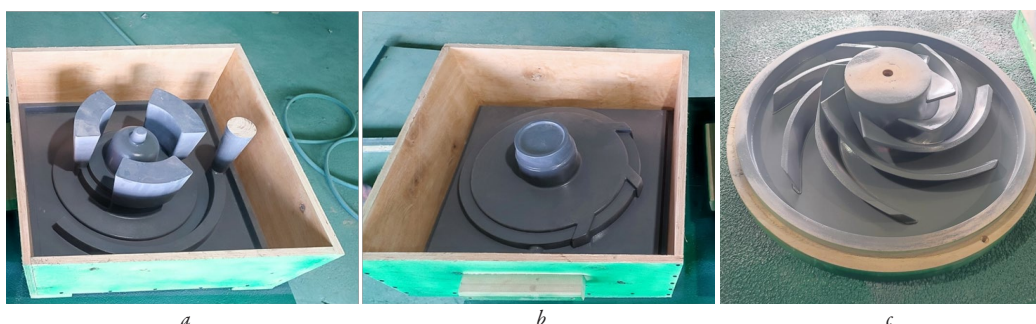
Elements of the impeller model tooling after manufacturing: *a* – model of the lower part of the impeller; *b* – model of the upper part of the impeller; *c* – lower part of the core box with additively manufactured blades
